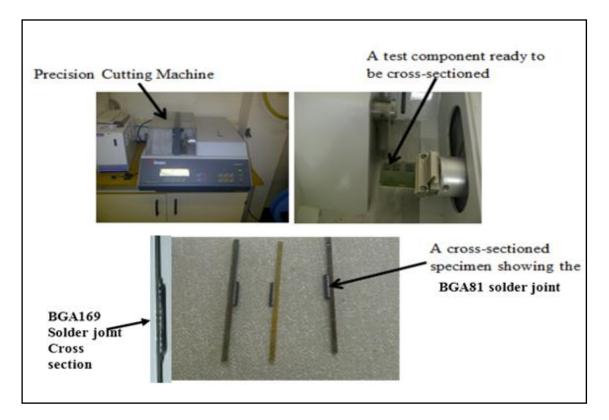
Precision Cutter & strips of cross-sectioned BGA components
